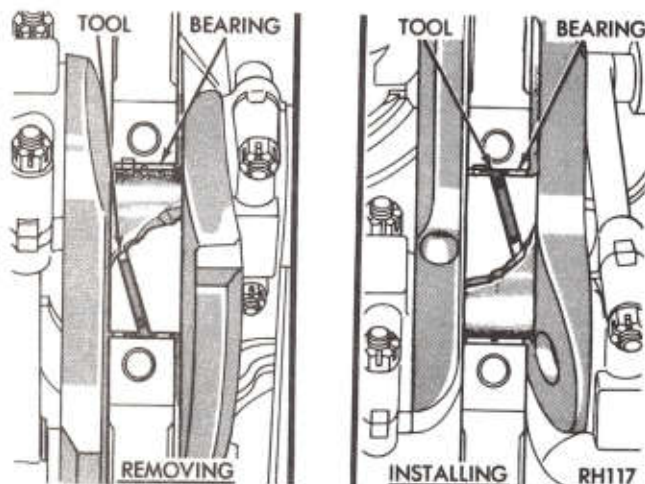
Removing and Installing Upper Main Bearing with Tool C-3059
